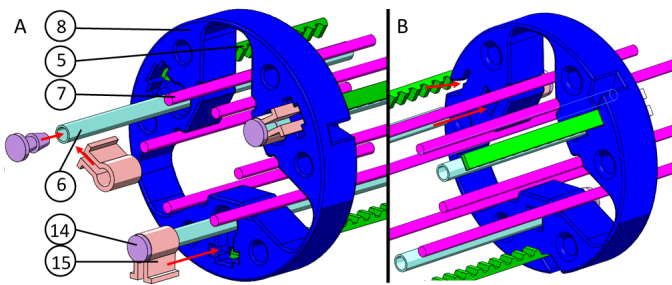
Exploded views of the Outer-shaft end-effector disk. (A) An exploded front view of the Outer-shaft end-effector disk (8). The air tubes (6) are closed off with plugs (14) that are secured with clamps (15) which squeeze in the slots. (B) An exploded back view of the Outer-shaft end-effector disk. The six guidewires (7) fit concentrically to the slots located along the inner perimeter. The timing belts (5) tangentially slide in the slots that geometrically constrain their axial movement
